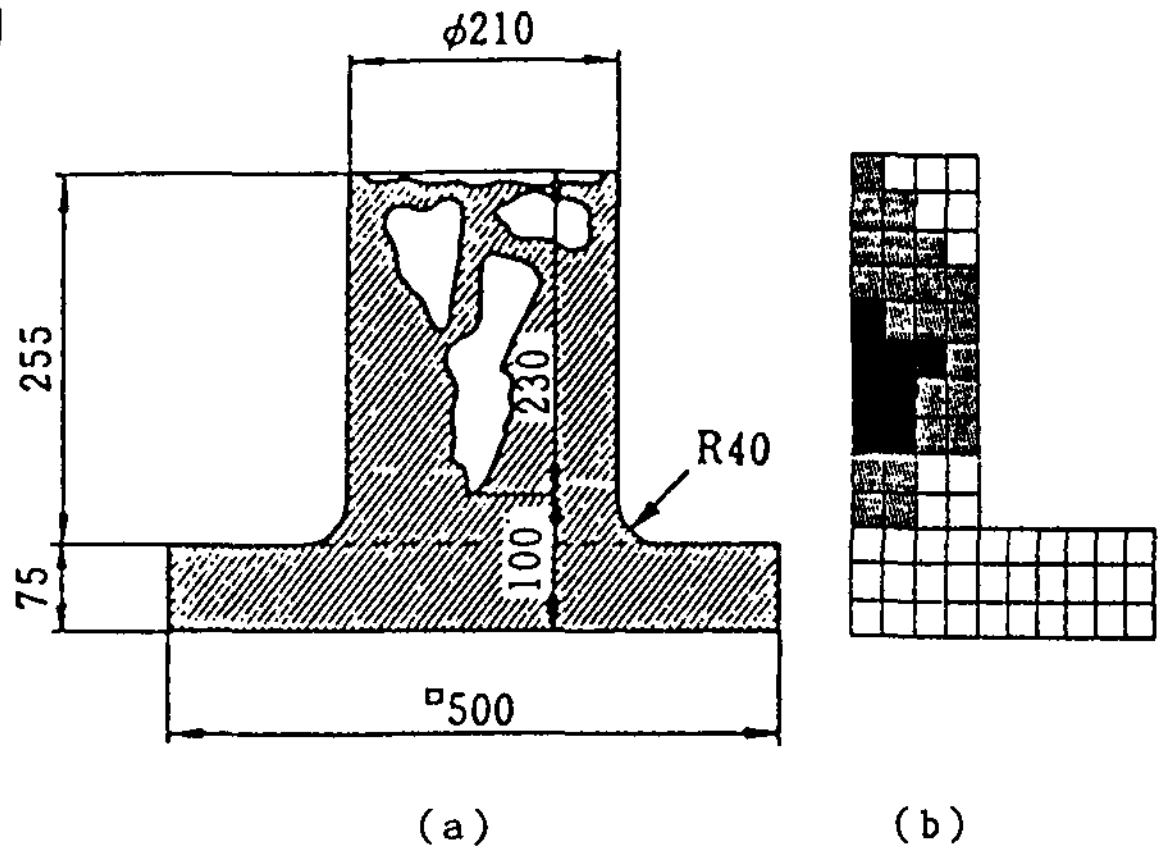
Prediction of shrinkage defects in carbon steel castings. (a) Experiment[7] (b) Calculation by FDM
